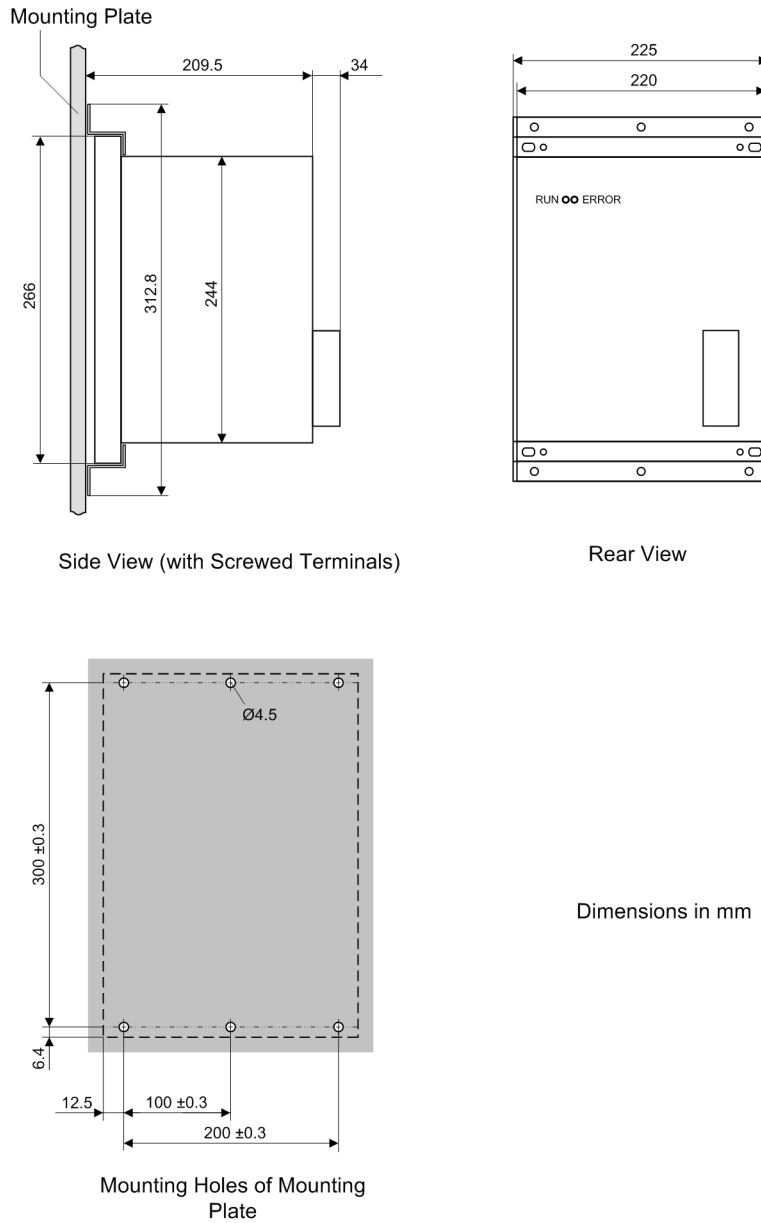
Dimensions of a 20-Hz Generator 7XT3300-0CA00/DD for Panel Flush or Cubicle Mounting
